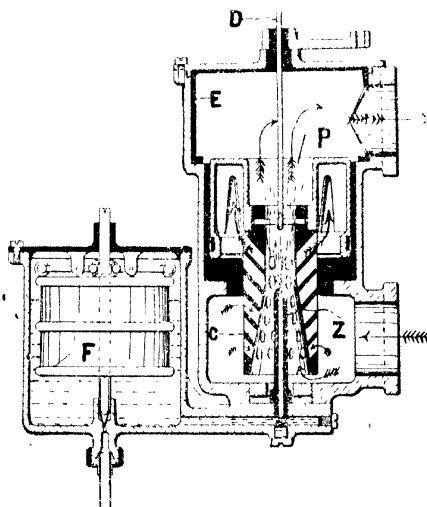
Float-feed single jet carburettor with perforated choke tube and combined automatic and hand-controlled mixture regulation—Rover.
